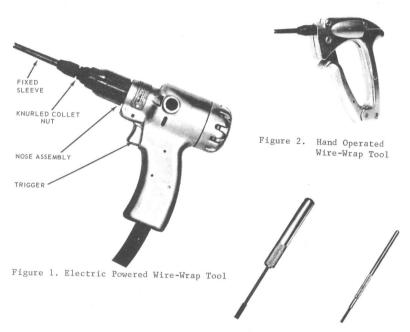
Figure 4. Hand Wrapping Tool. Hand Unwrapping Tool.
